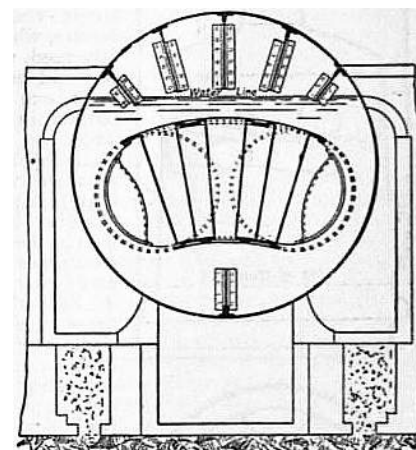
Galloway Boiler: Section beyond the Bridge.
